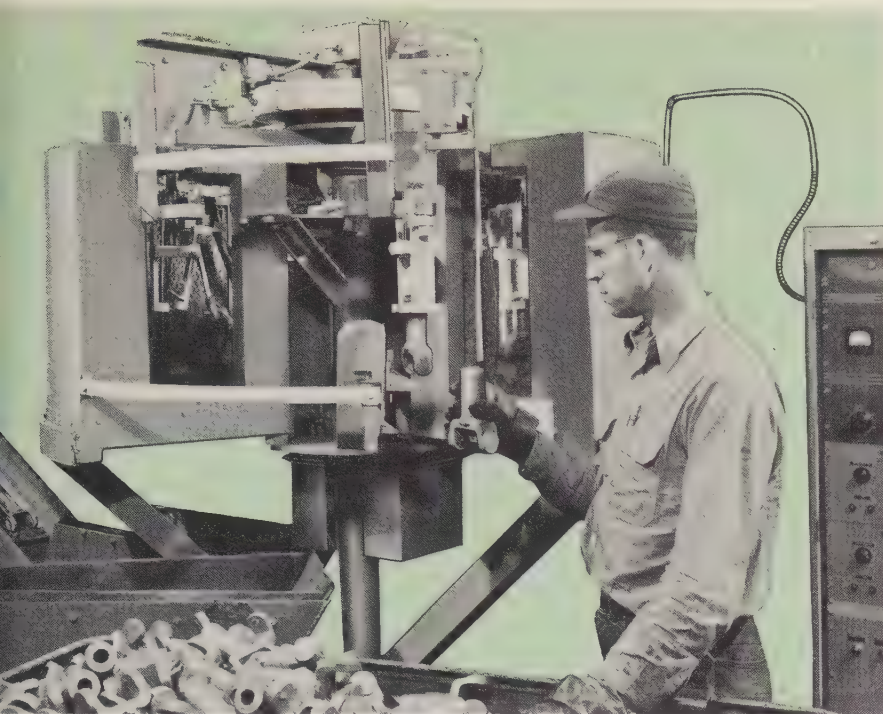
At the loading station of the sonic inspecting machine an operator positions a universal-joint slip yoke to be inspected into a guide which holds the casting in the correct position until a clamping device passes by and automatically opens and clamps the casting. The device then passes the casting to the ringing station which is shown slightly to the right of the operator's raised hand. In the foreground are castings ready for inspection. At the extreme right is a partial view of the cabinet housing the electronic control equipment. In the left background can be seen the conveyor which transfers good castings to a shipping hopper.
